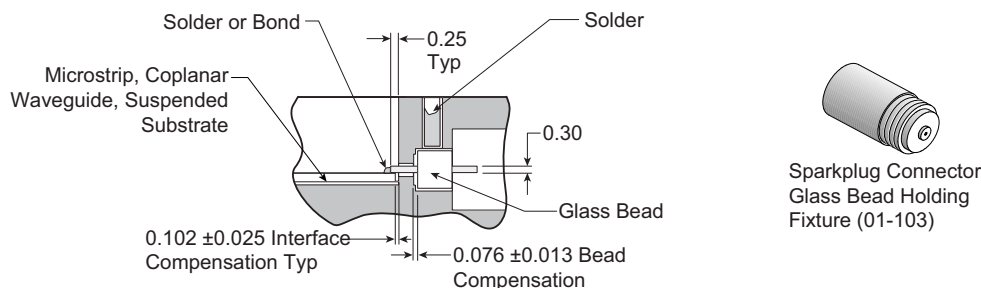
K102M-R or EK102M-R Glass Bead Assembly
